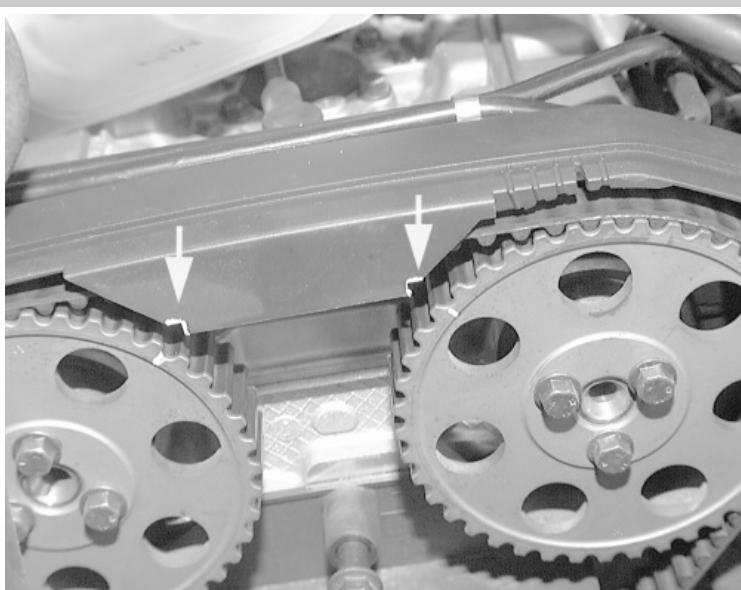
Line up the camshaft pulleys with the marks on the engine mounting plate
